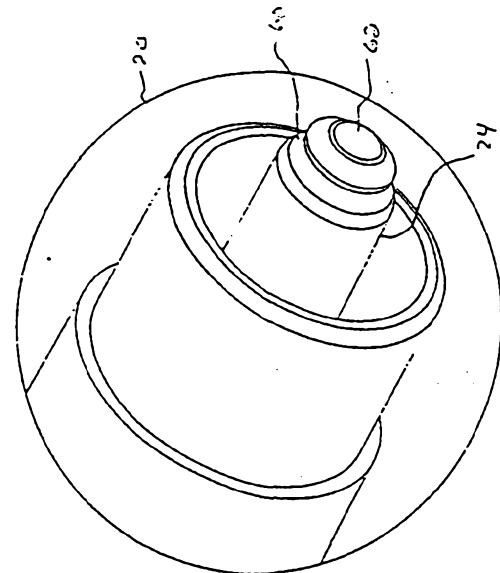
B ISO VIEW - ONE THIRD ENGAGEMENT POSITION
